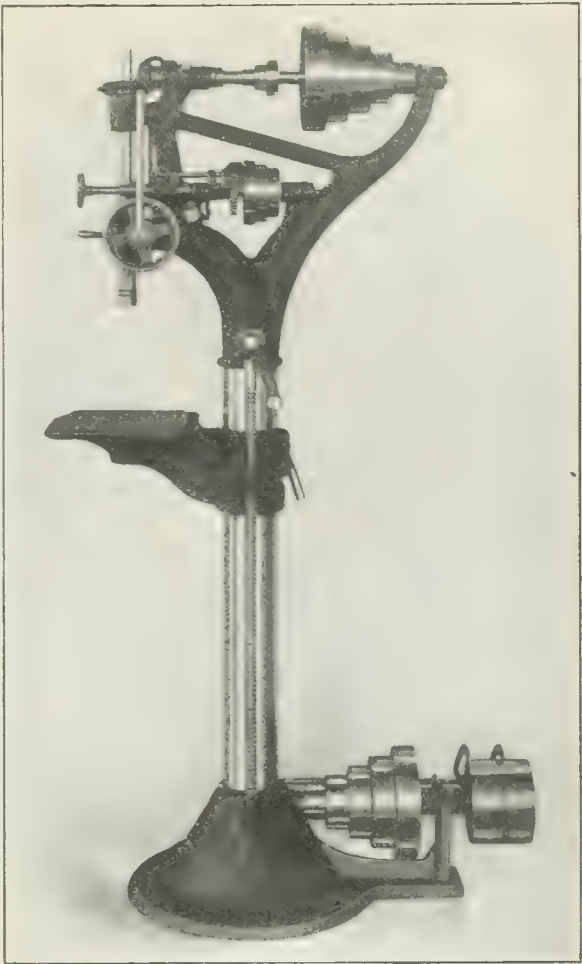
The New 14-In. Drill Built by the Rockford Drilling Machine Company, Rockford, Ill.
